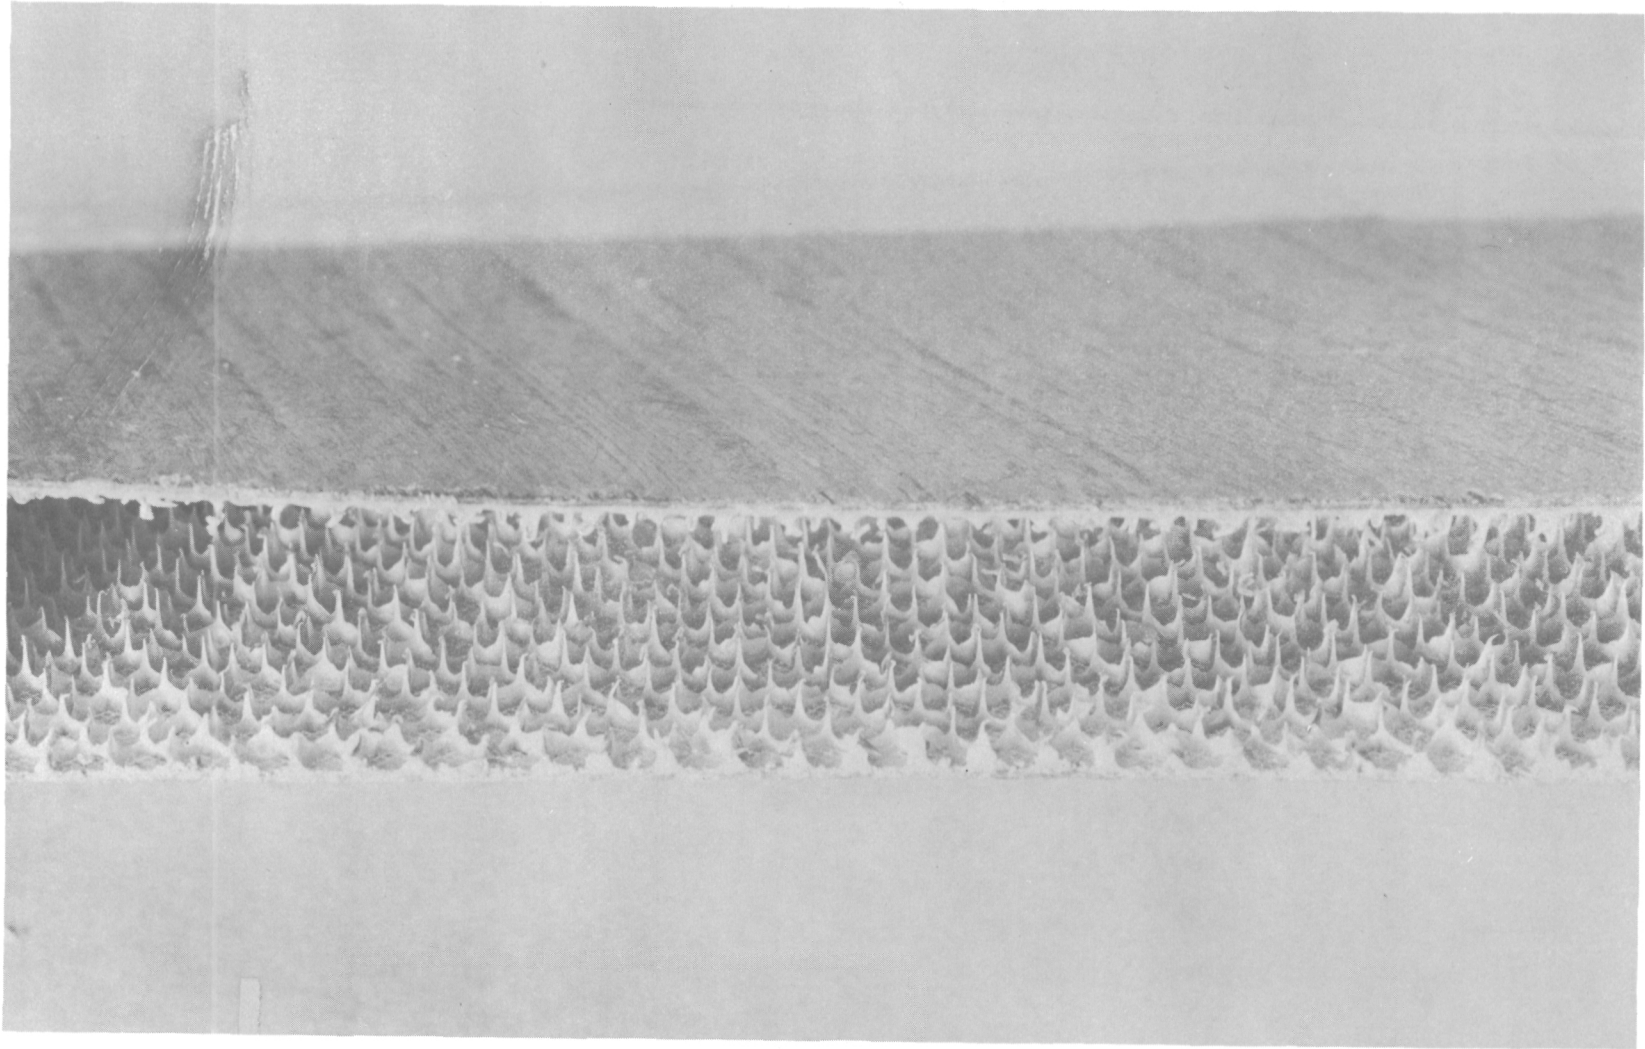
Chem-Milled Sections of -3 Test Spoiler
